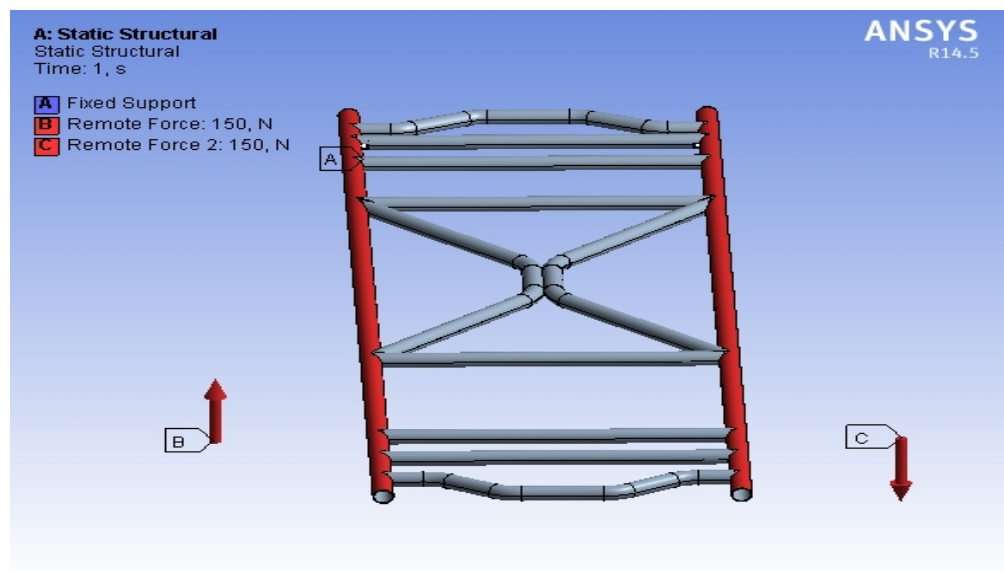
Torsional loading of the circular tube profiled ladder frame chassis
